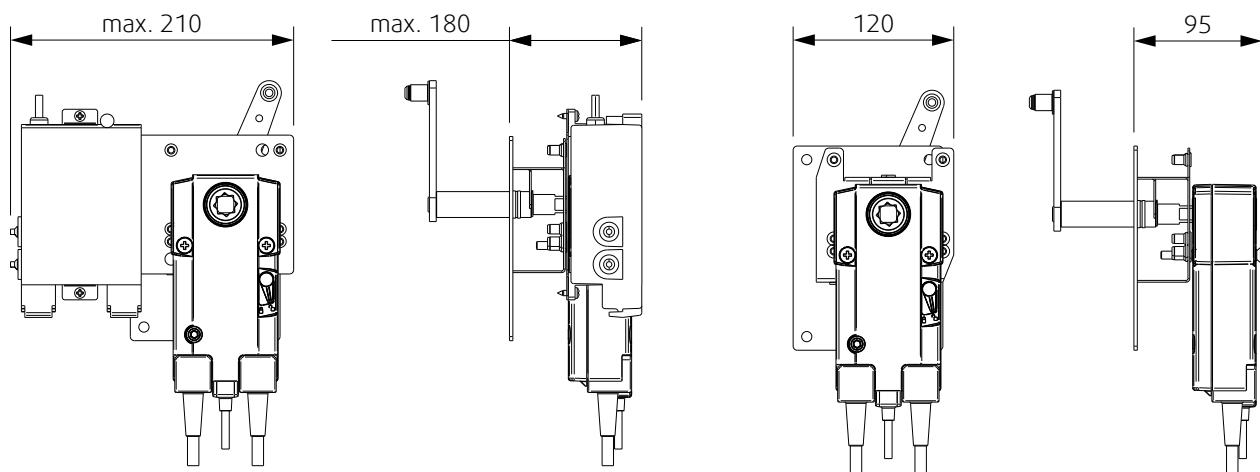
Dimensions of the Belimo actuator mechanism with (left) and without (right) communication unit
